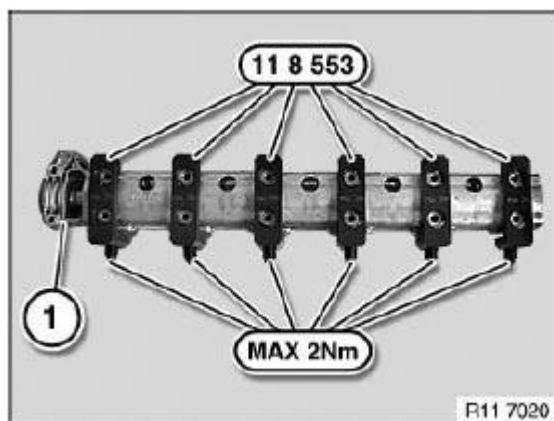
Identifying Upper And Lower Bearing Strips With Special Tools 11 8 553
